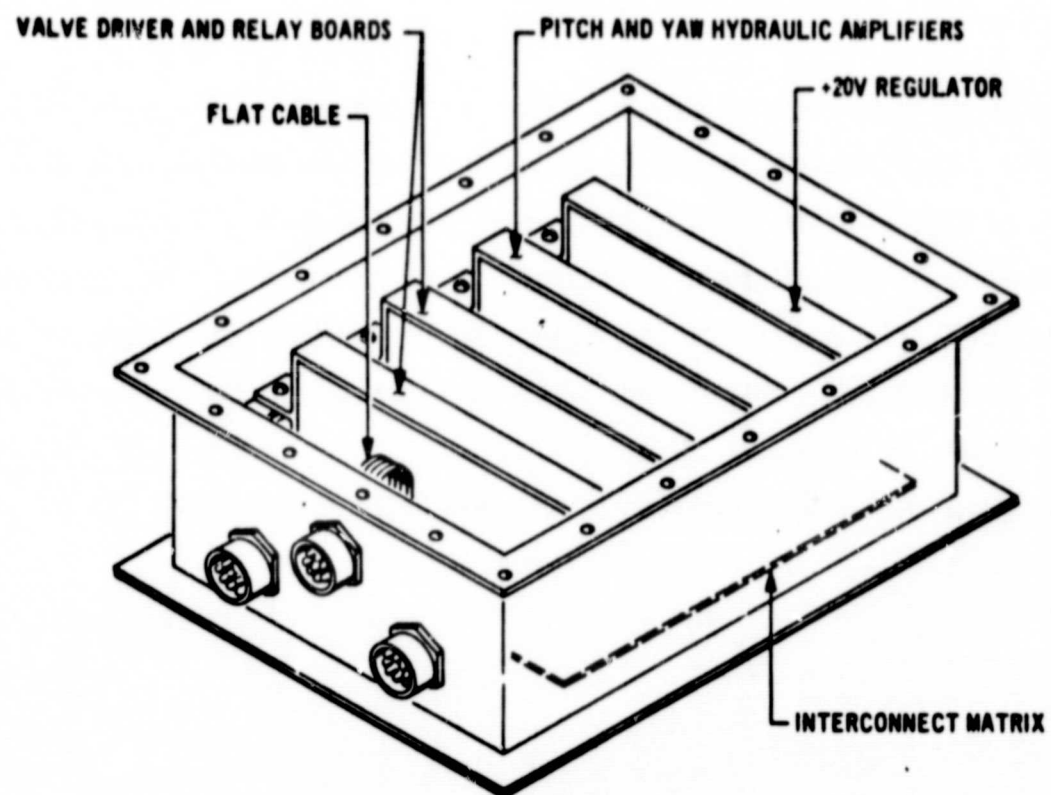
Flight Control Electronics Assembly With Cover Removed
